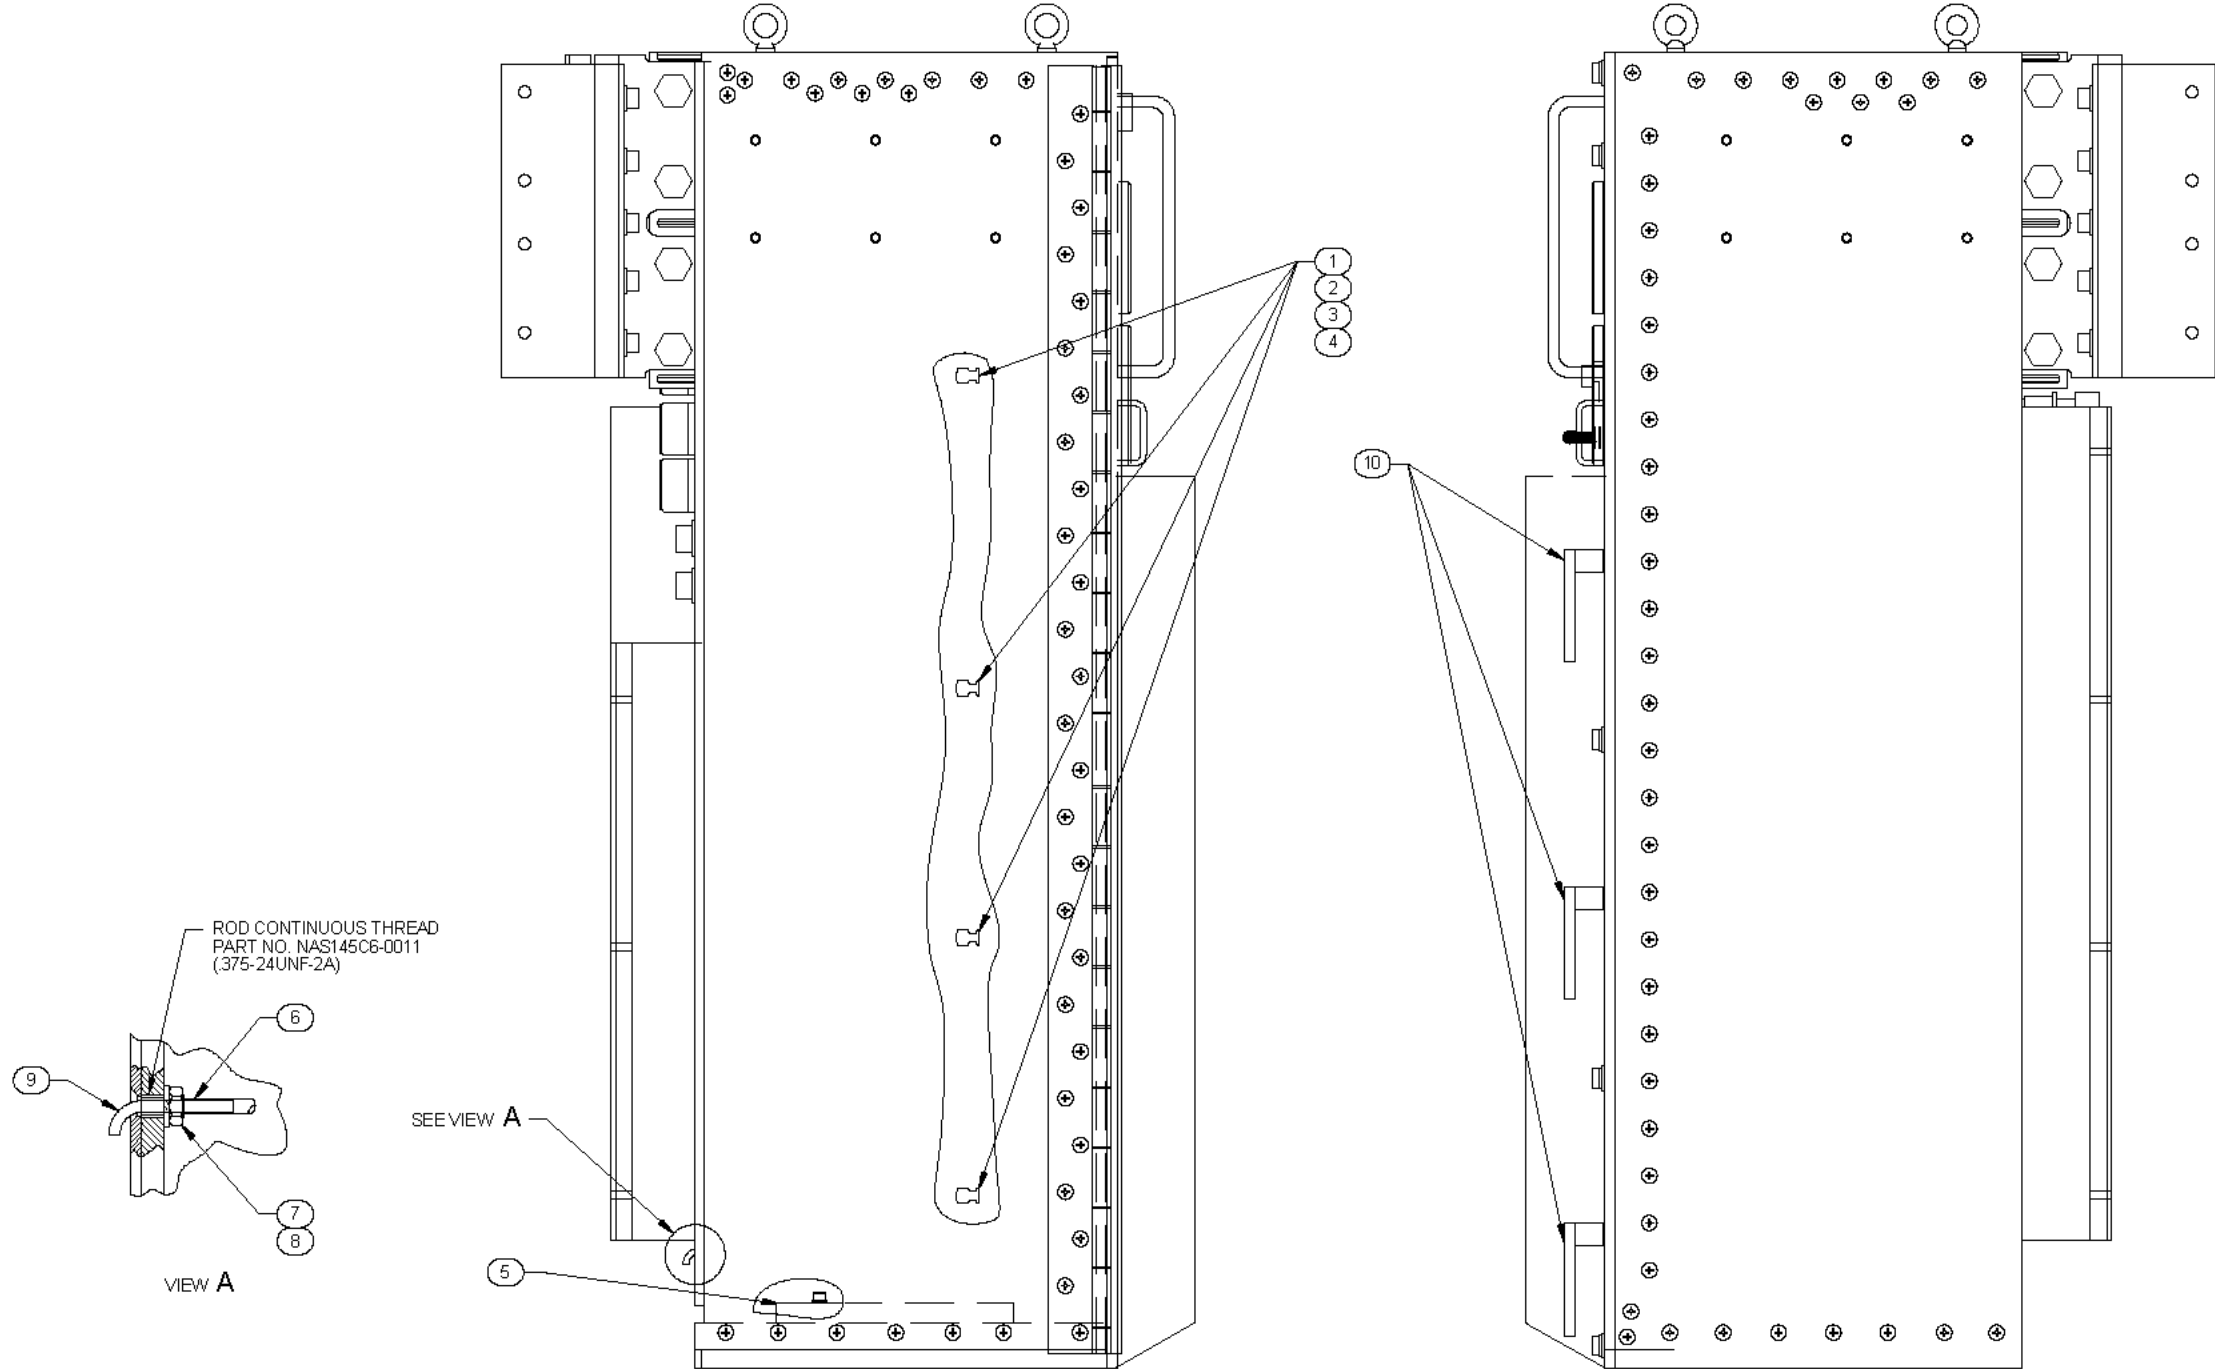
Processor Cabinet Assembly (1A1) (Unit 1) Side Views
